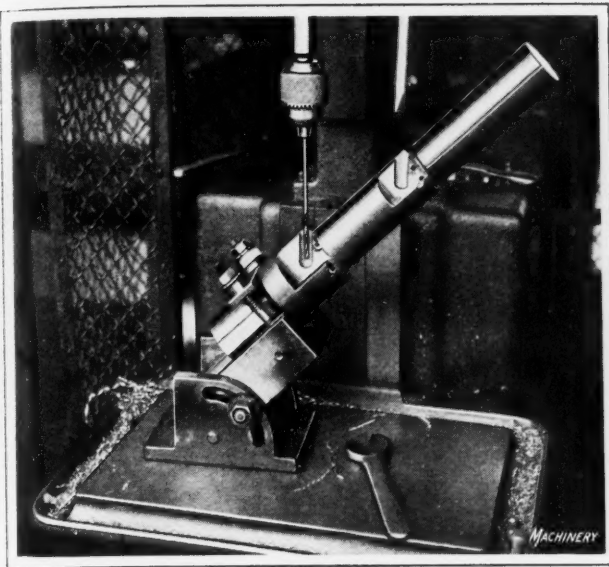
Angular Jig used in drilling and tapping the Blade Adjusting Screw Holes in Rigid Bar Tools
